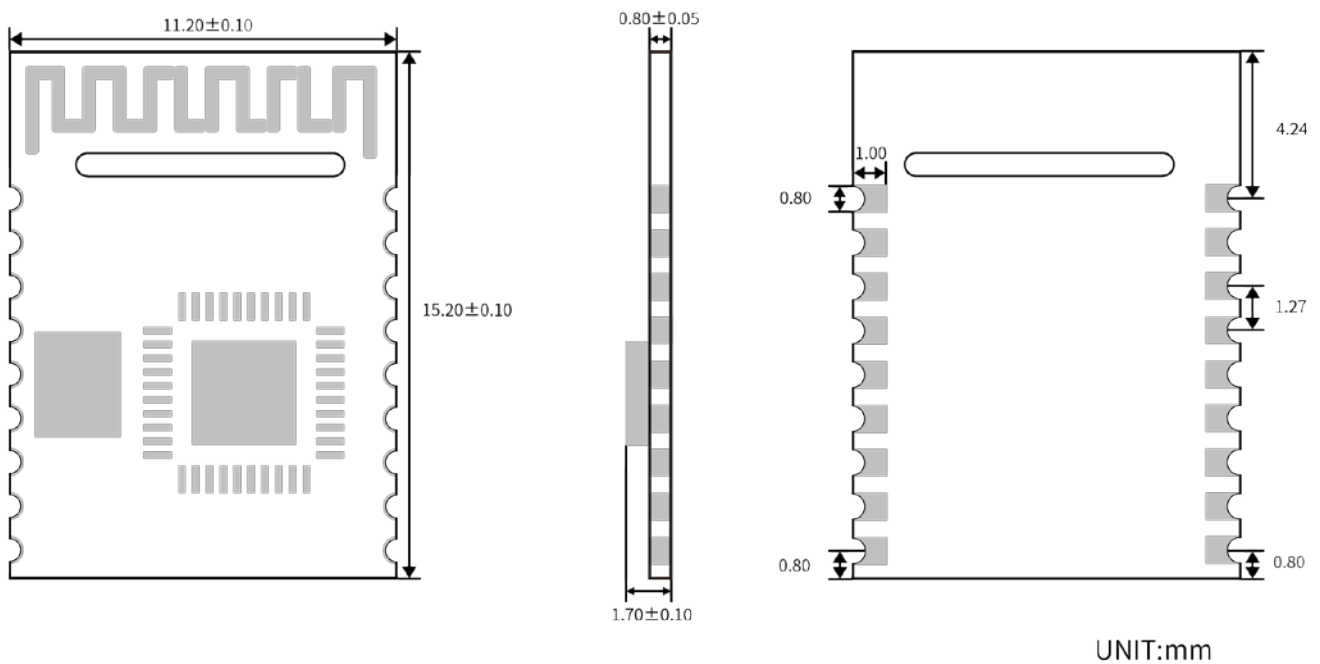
Recommended PCB Footprint of RSBRS02ABR (mm)
